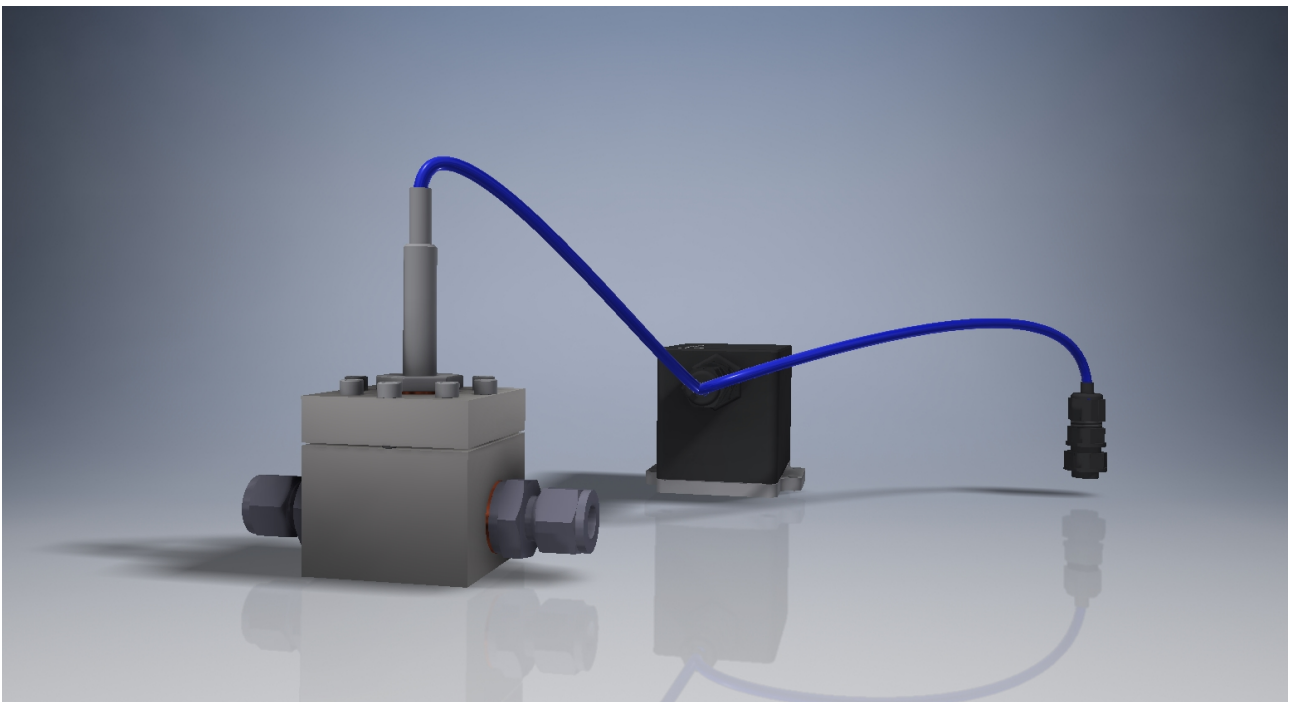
Example of mounting O₂-sensor system with housing for pipe connections
